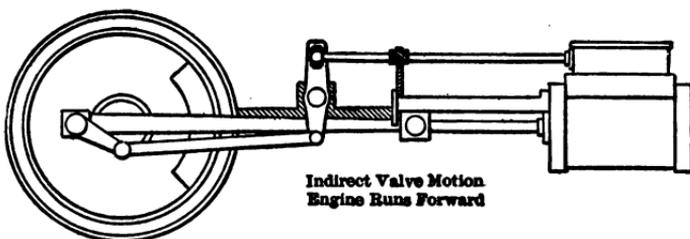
Simple Form of Steam Engine with Indirect Valve Motion.
